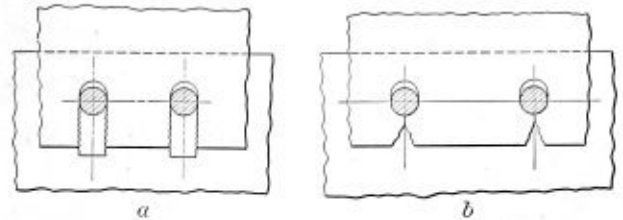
Failure Due to Rivets Pulling Out
